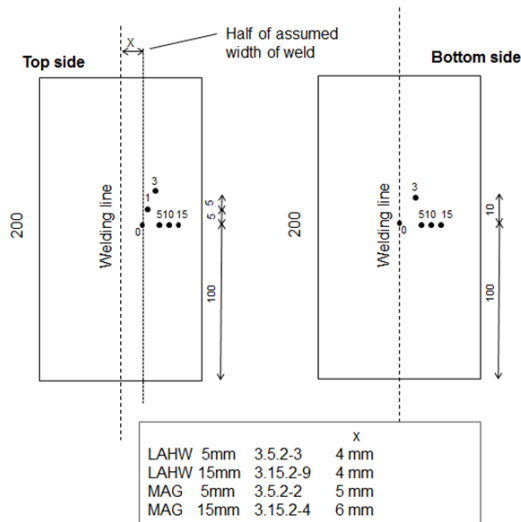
Position of thermoelements for bead-on-plate LAHW and MAG welded samples.
